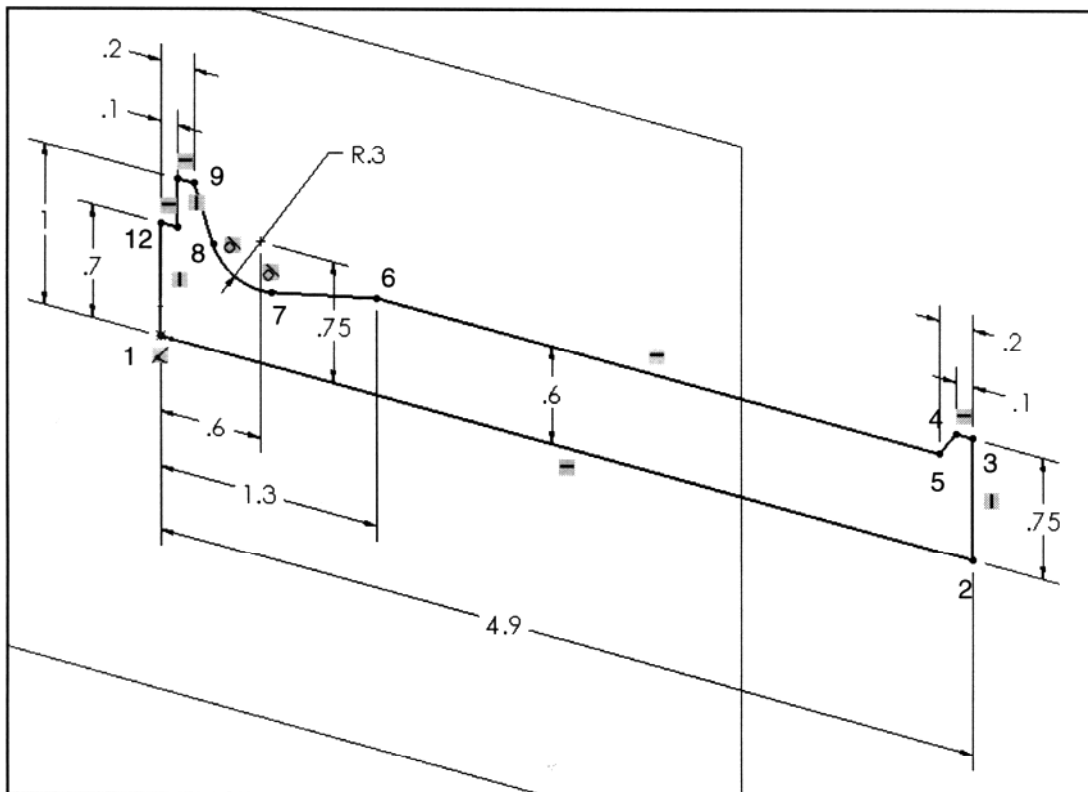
With a little care, we can get SW to "see" that we want all but three of the lines to be either horizontal or vertical, the arc tangent to two of the sloping lines, and the bottom and left edges meet at the origin (points 10 and 11 not labeled in figure because of space).
